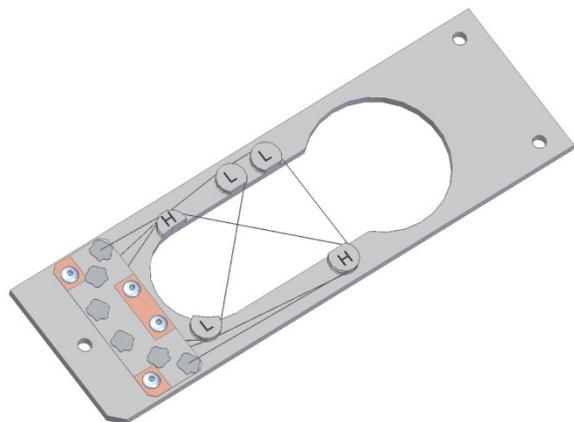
Wire card assembly showing how the x, y and u wires are mounted.
